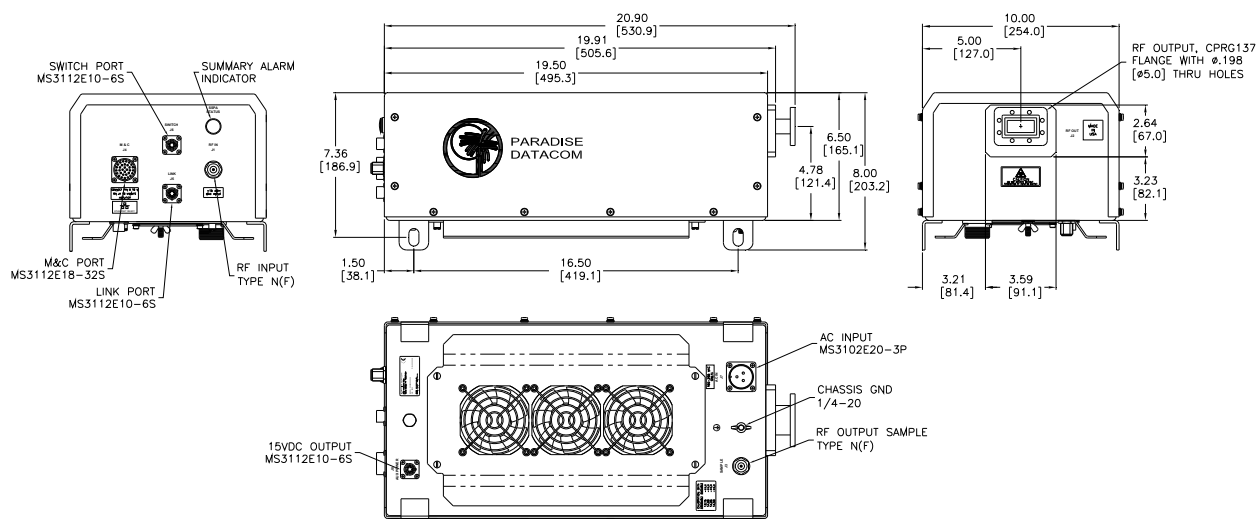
Outline Drawing, Typical Compact Outdoor SSPA (C-Band Shown)
